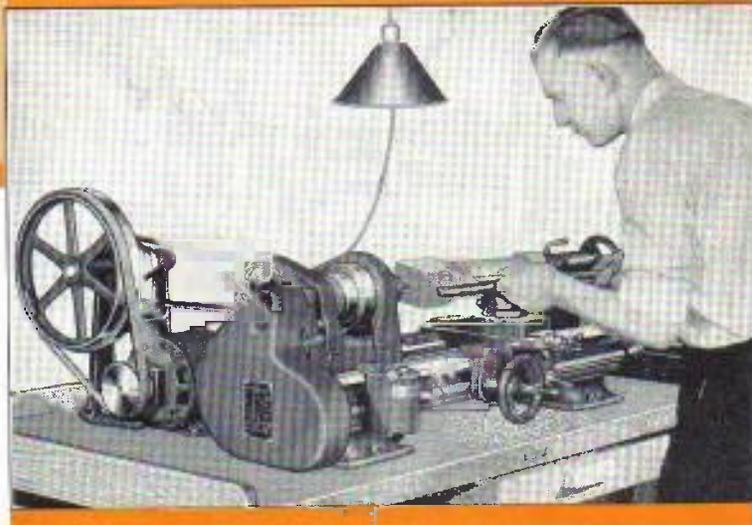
9-inch "Workshop" Lathe Equipped with 2-step Pulleys on Countershaft and Motor with Belt Arranged for Woodworking.
